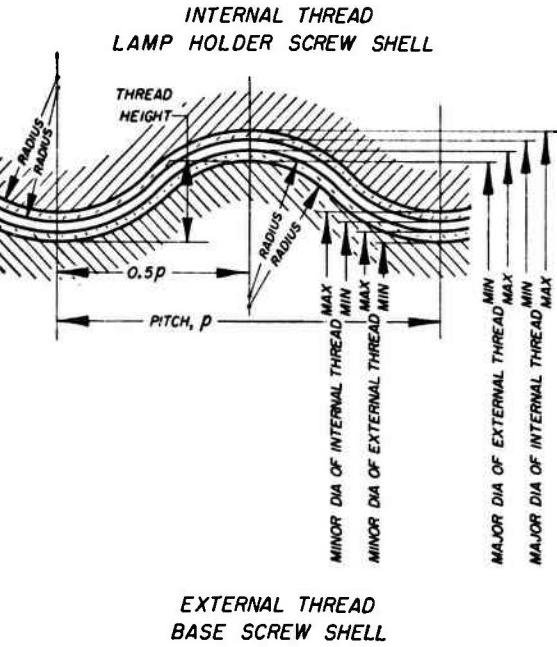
Illustration of thread form, allowance, and tolerances, American Standard rolled threads for screw shells of electric lamp holders and lamp bases.
